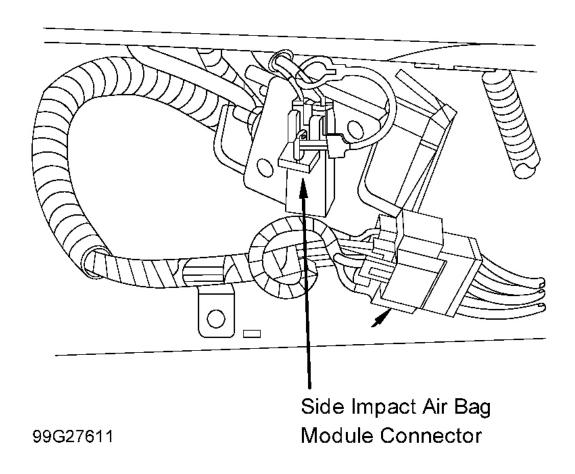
Identifying Side Impact Air Bag Module Connector. Courtesy of ISUZU MOTOR CO.
